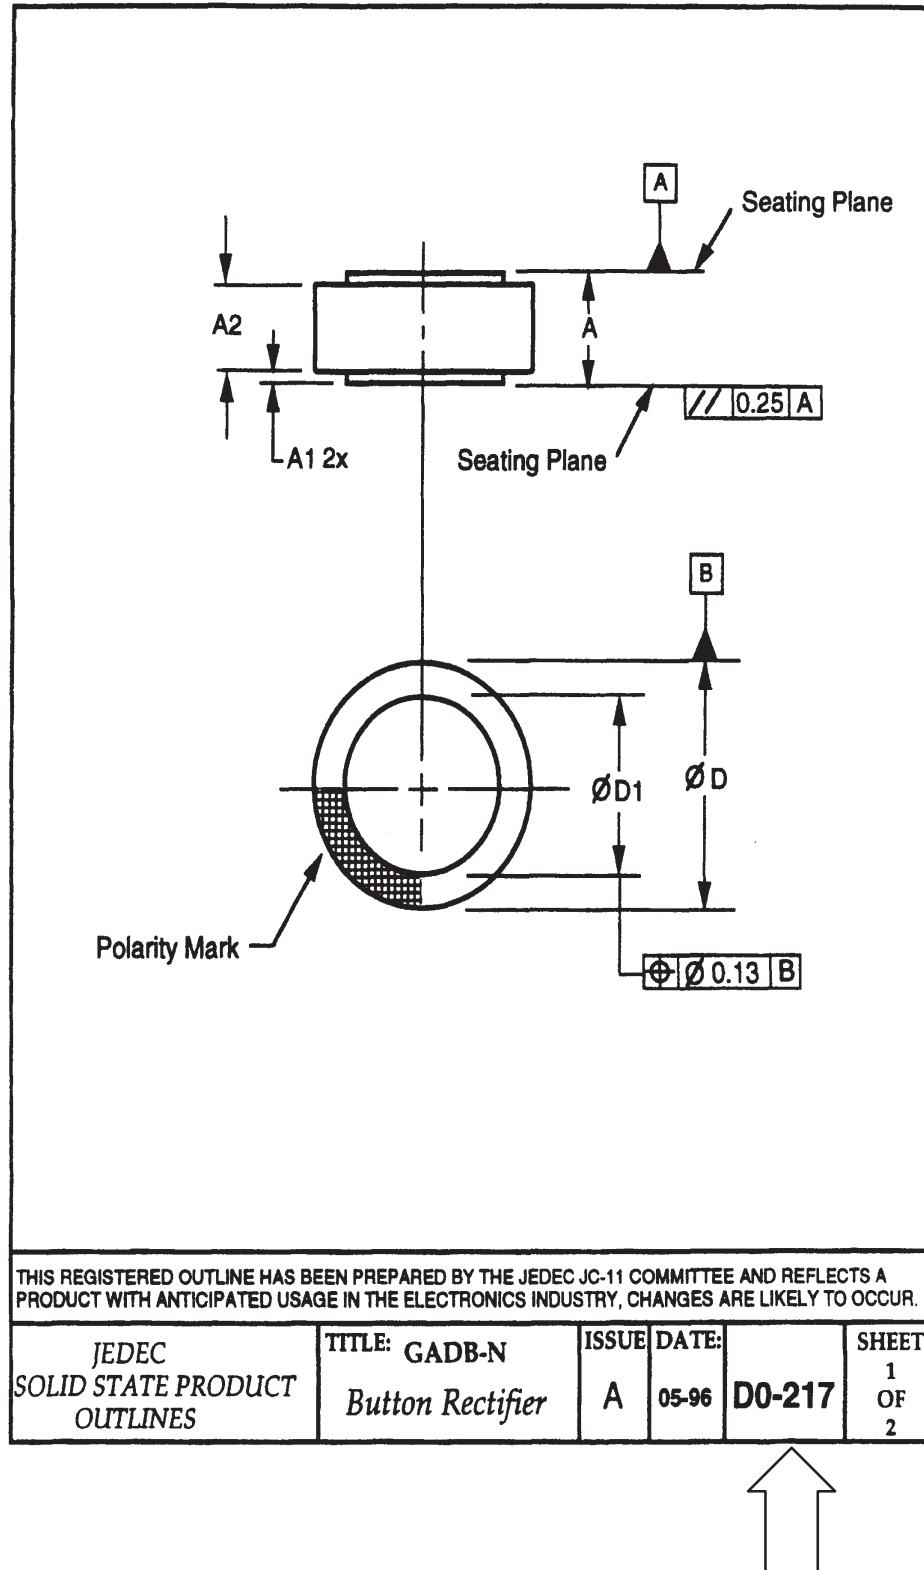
Example of a Diode Registered-Outline (DO) Drawing Top Sheet
